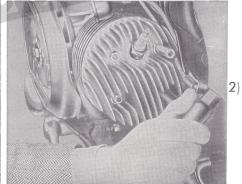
Dismantling cooling hood from engine (1) and head (2).
